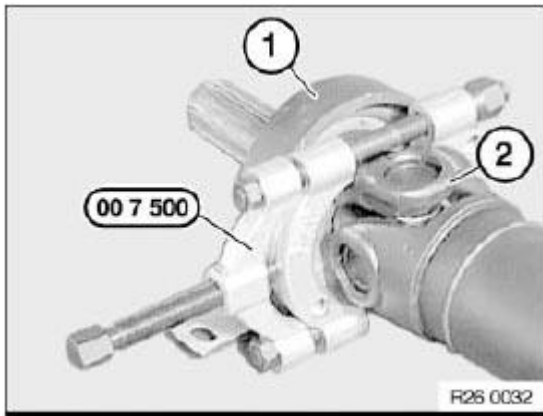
Identifying Special Tool (00 7 500) On Center Mount And Universal Joint (2)
